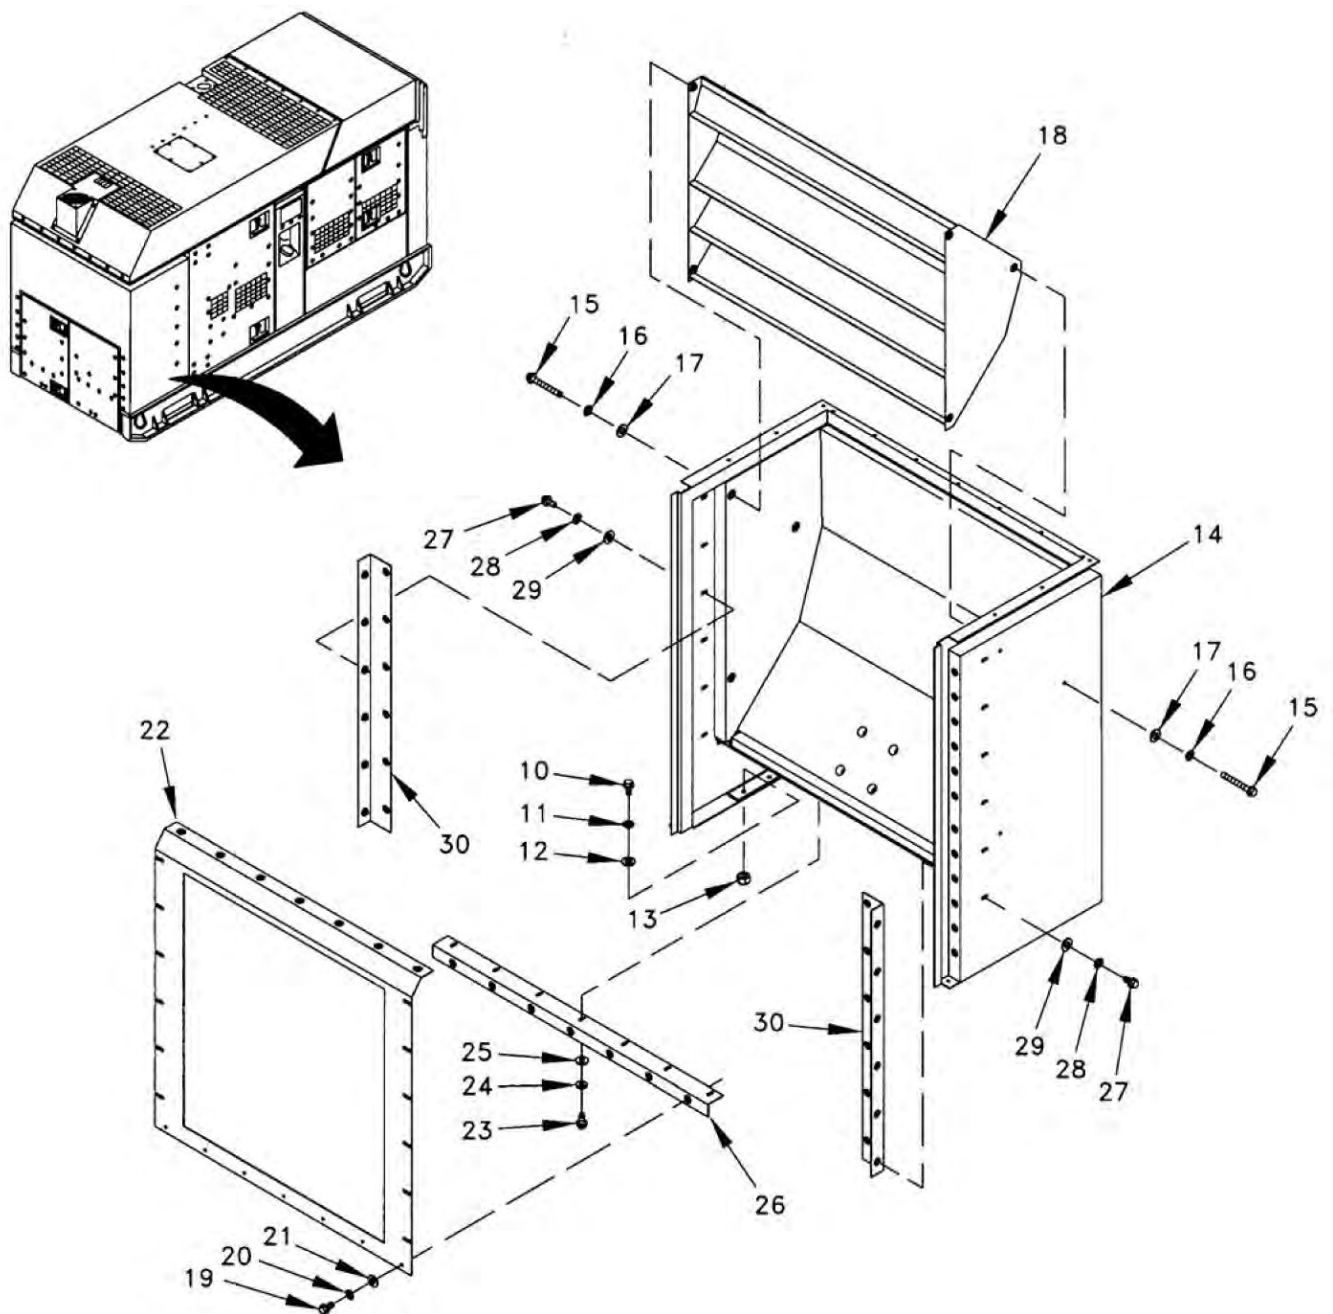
Front Section Housing Assembly (Sheet 1 of 2).
